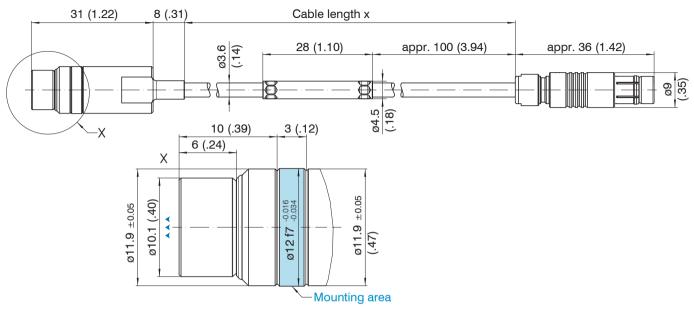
Dimensional drawing sensors ES-U3-T-CAx/mB0, dimensions in mm (inches)
